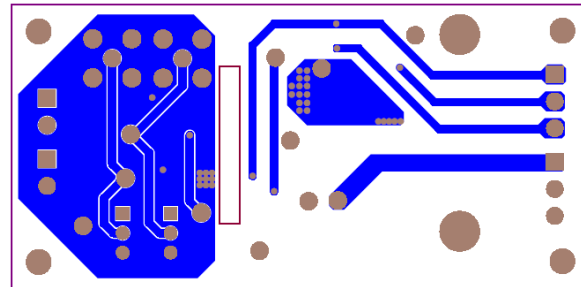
shows the top and bottom layer traces and copper of printed circuit board layout.
